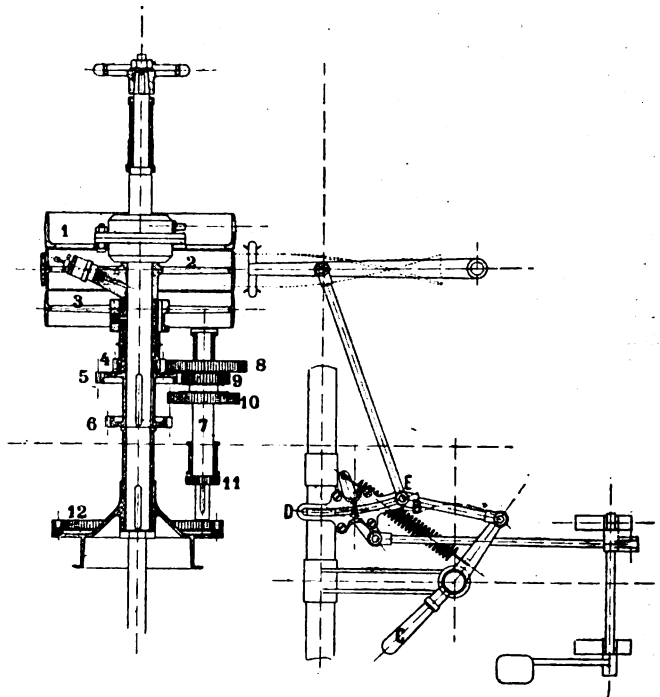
SECTION OF DELAHAYE CHANGE-SPEED GEAR.
